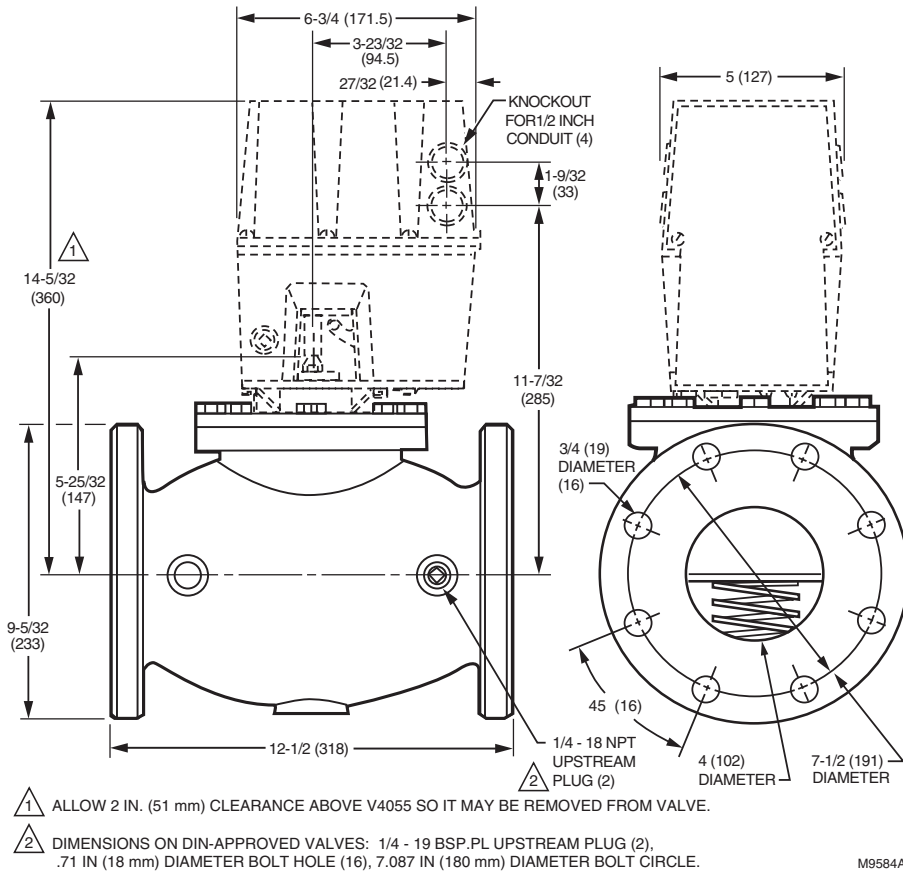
Approximate dimensions of the 4 in. V5055 Valves, with valve actuator, in in. (mm).
